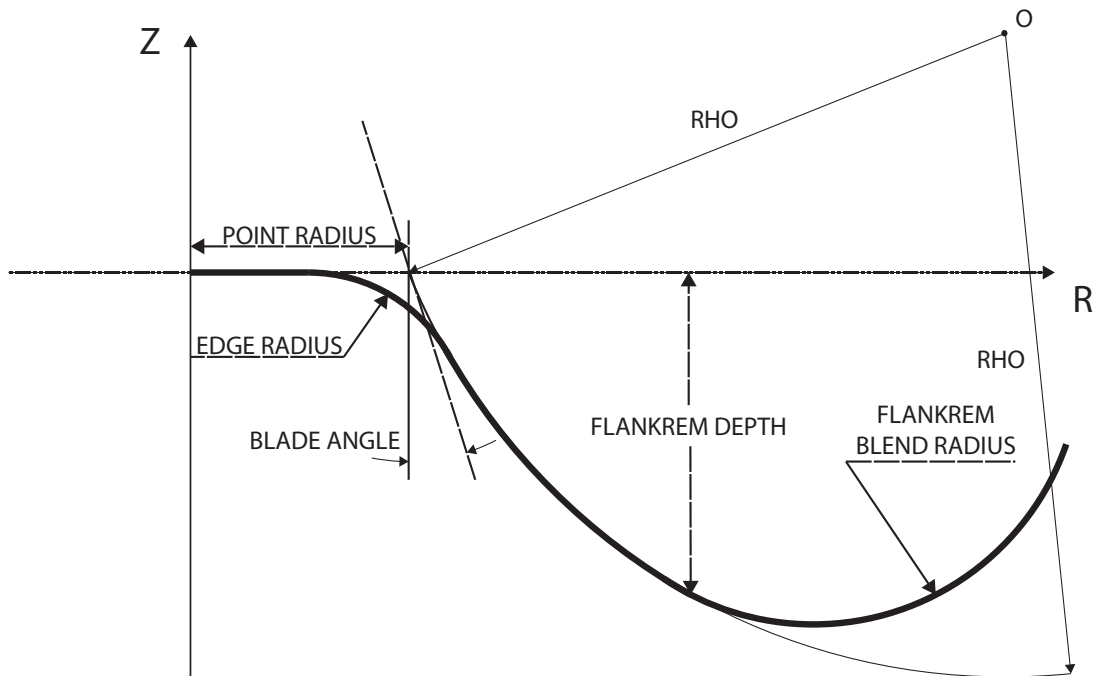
Cutter description for Curved Blade with Blended Flankrem (New Cutter)
